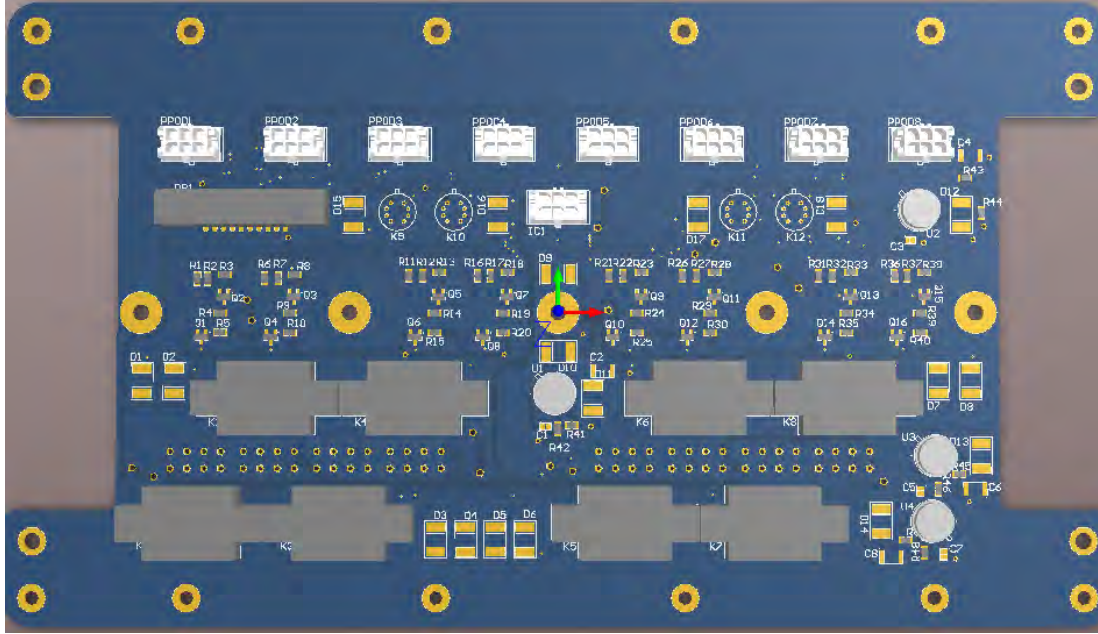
SAD with PCB design, showing mounting and connector location (from [2])
